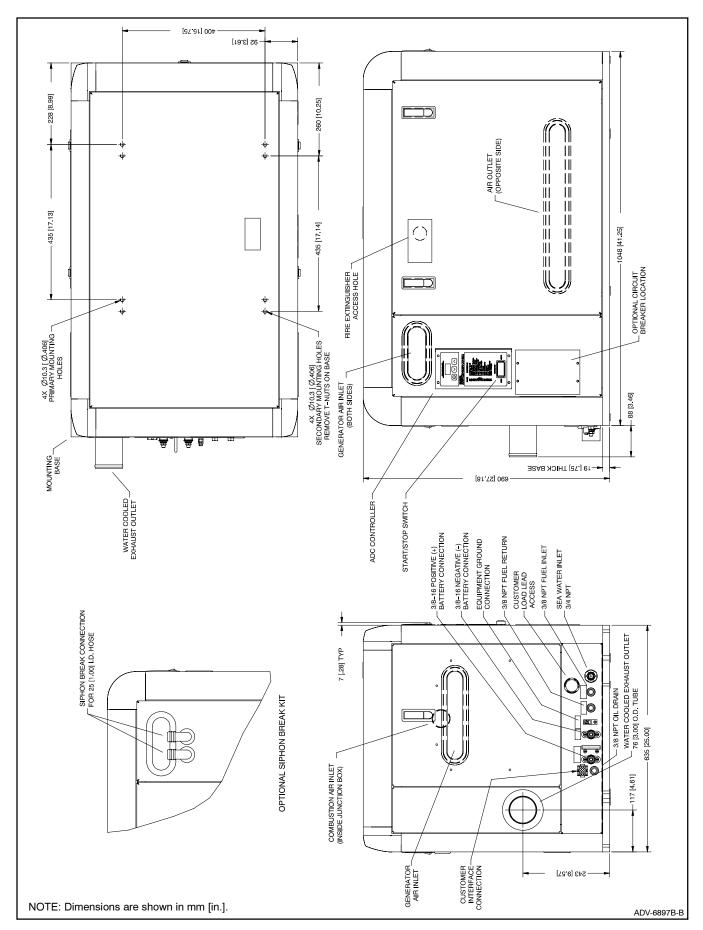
Dimension Drawing, 14/15.5EOZD and 11.5/13EFOZD with Sound Shield
